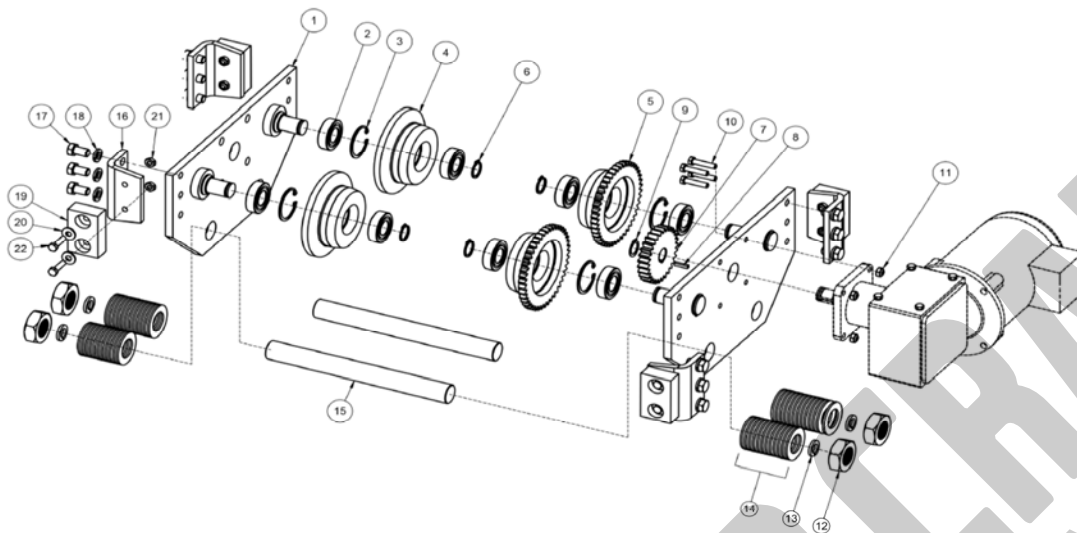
Trolley Frame and Wheel Assembly One Motor 6-1/4" Wheels
